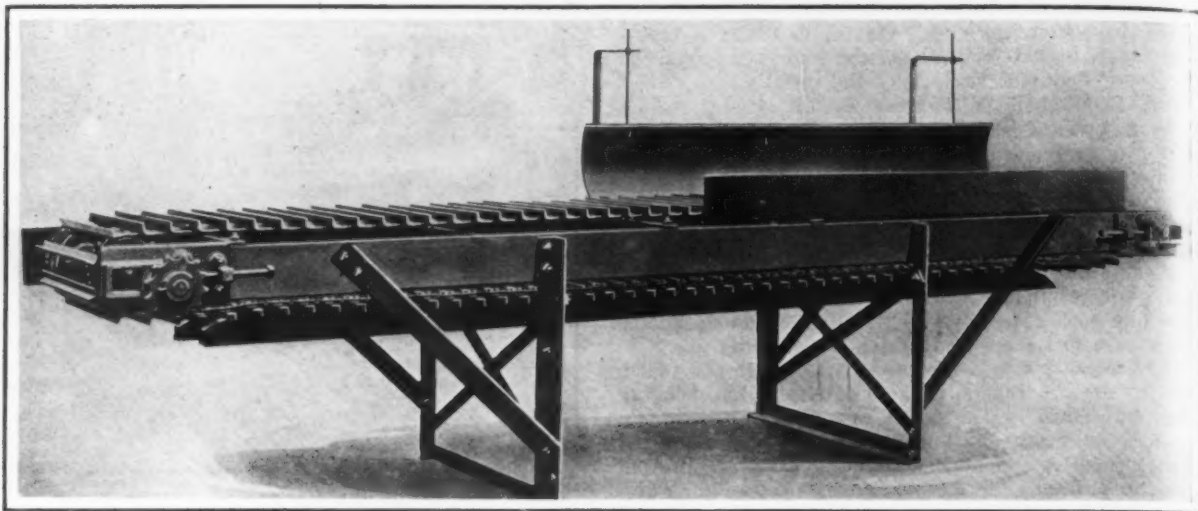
Standard Conveyor Operating Between Catcher and Cleaning Machine
